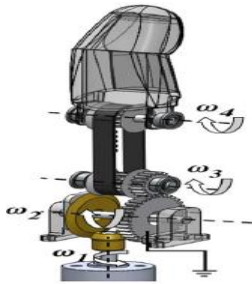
Finger Mechanism With Actuator and Drive Used [31]
